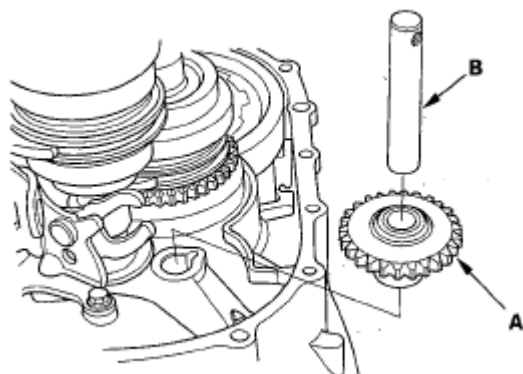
Identifying Reverse Idler Gear And Reverse Gear Shaft
